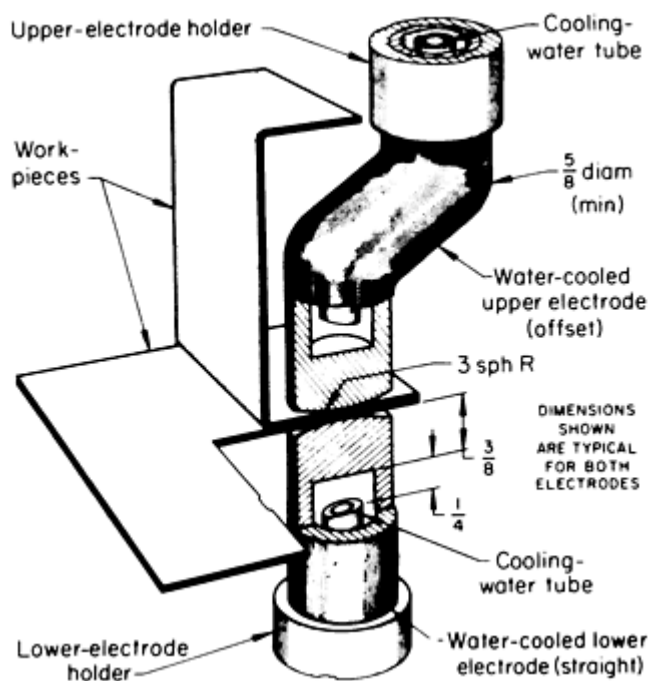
CUTAWAY VIEW SHOWING INTERNAL COMPONENTS OF STRAIGHT AND OFFSET RADIUS-FACE ELECTRODES USED IN RESISTANCE SPOT WELDING OF ALUMINUM ALLOYS
